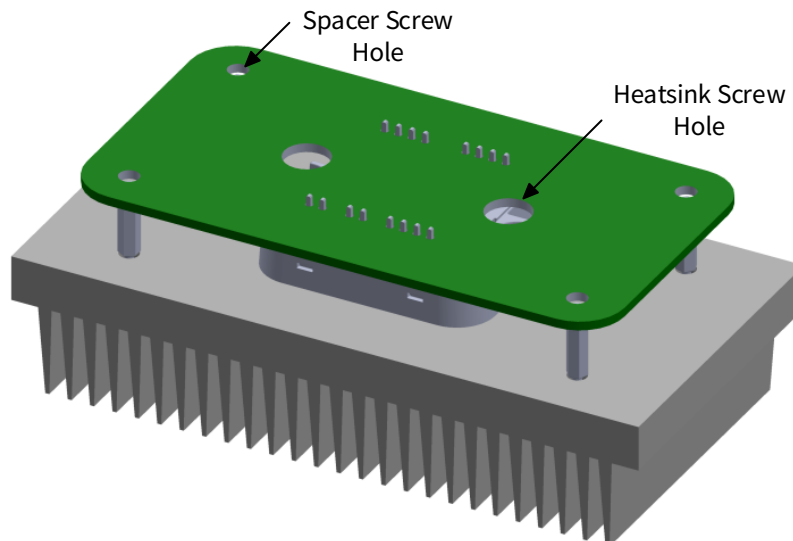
PCB Holes for Cold plate and Spacer Mounting
